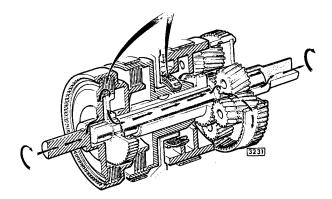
Mechanical power flow — First gear (Drive 1) selected
